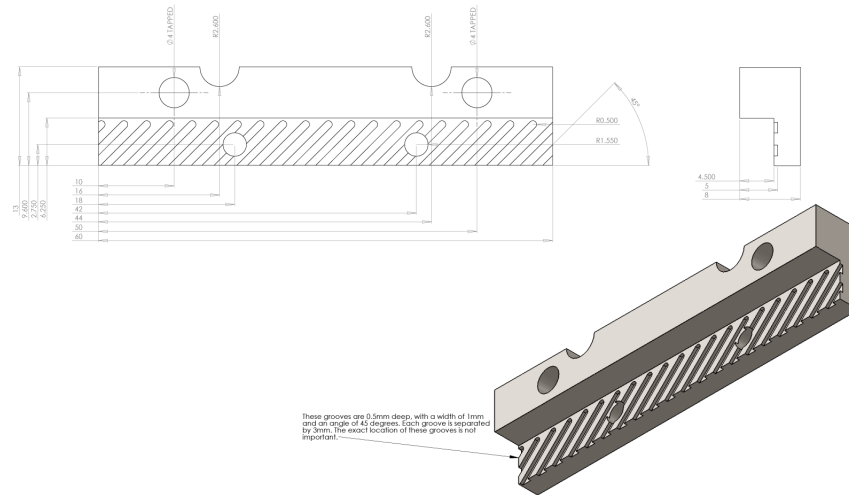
A SolidWorks drawing of the top aluminium clamp.
